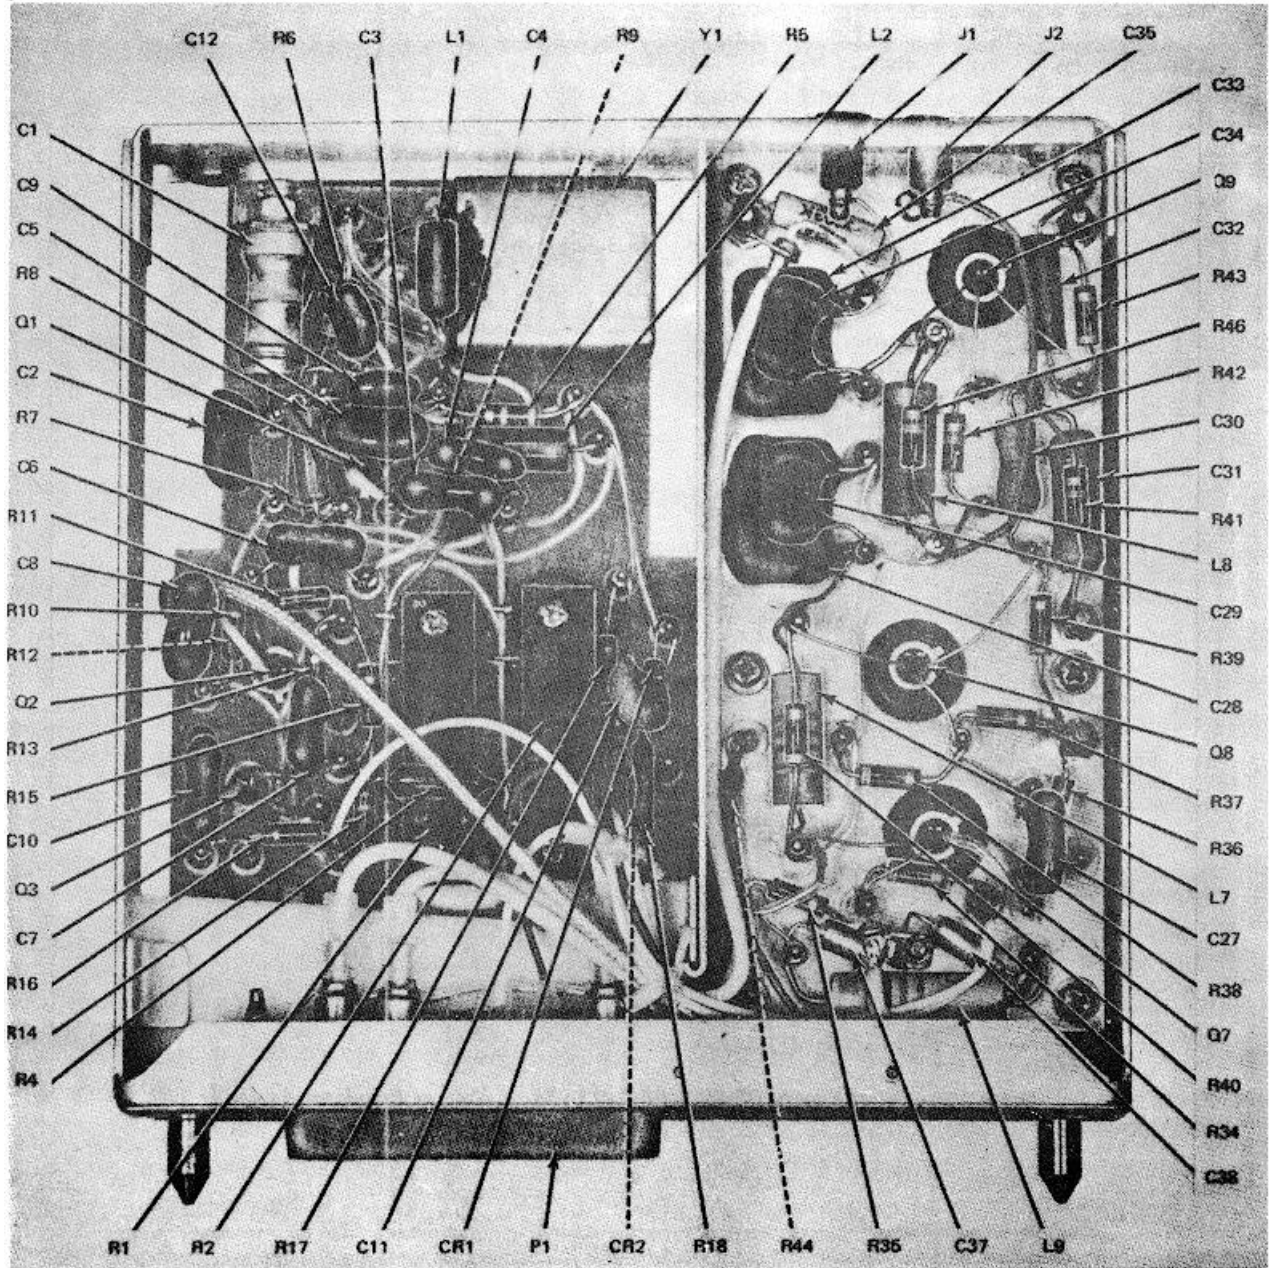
Radio Frequency Oscillator O-1032/PRC-47 (A8A6), Side View, Cover Removed, Card Assemblies E1 and E2.
